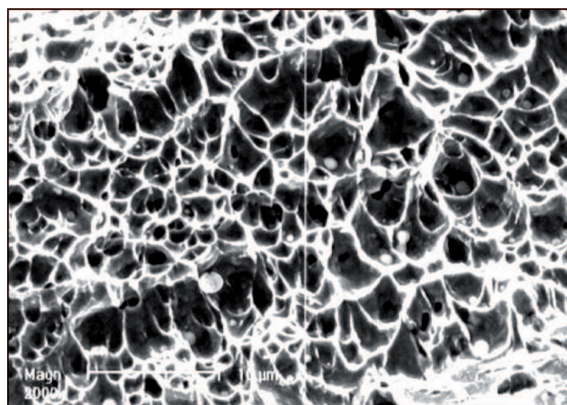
Fracture surface of weld metal deposit. (magnification 2000 $\times$ ). The photo presents the 2% content of Ni in the weld
